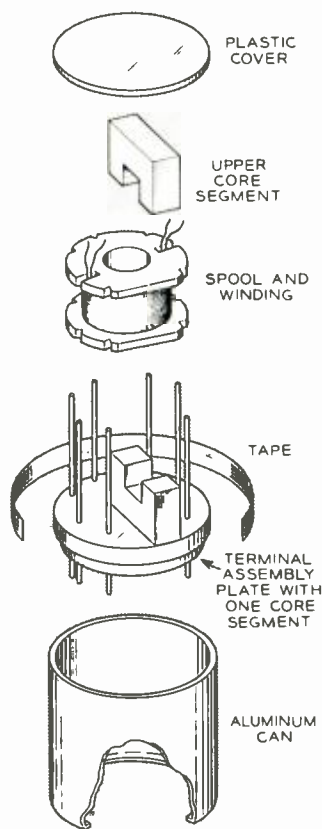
Exploded view illustrating the various components that make up the new carrier transformer.
